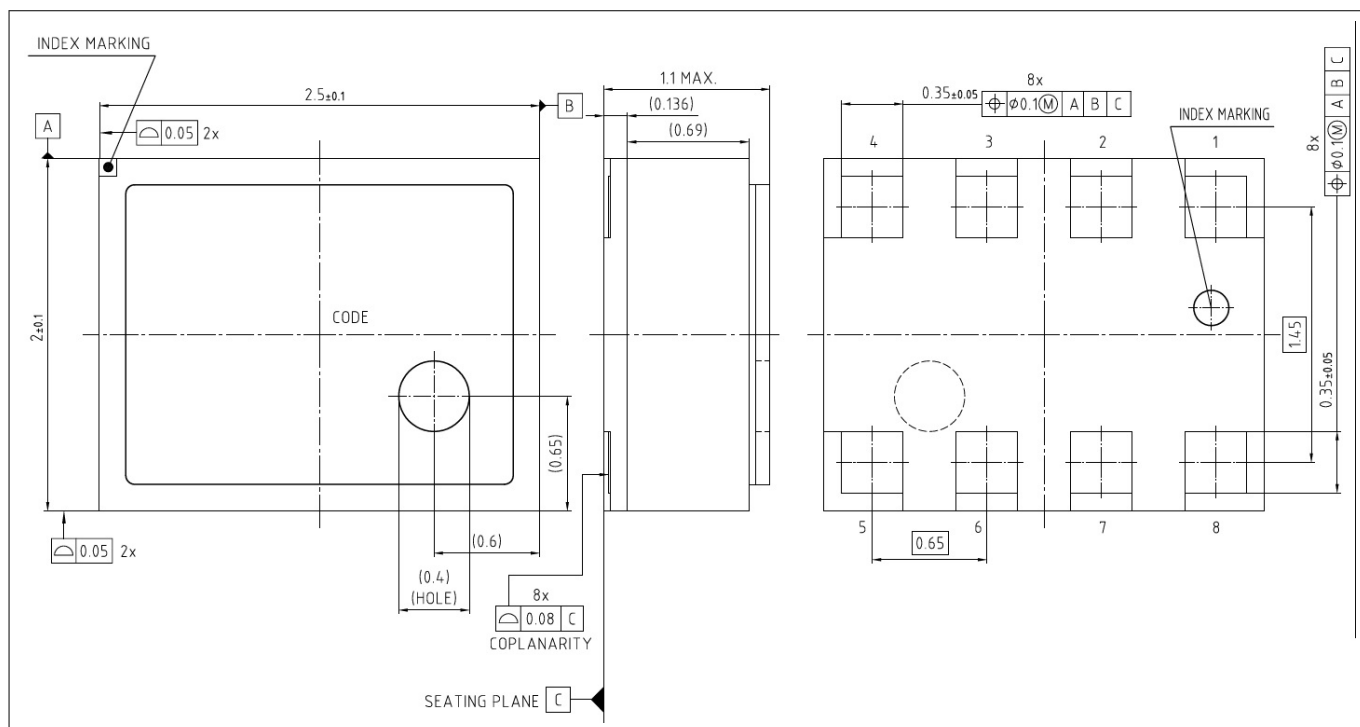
DPS368 package drawing (side view, top view, bottom view)
